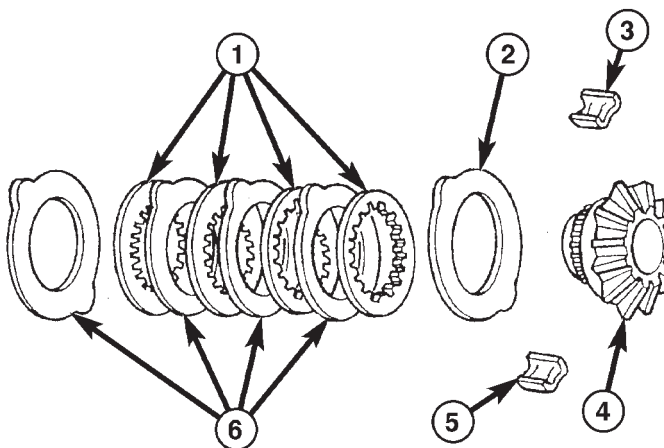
SIDE GEARS AND CLUTCH DISCS
